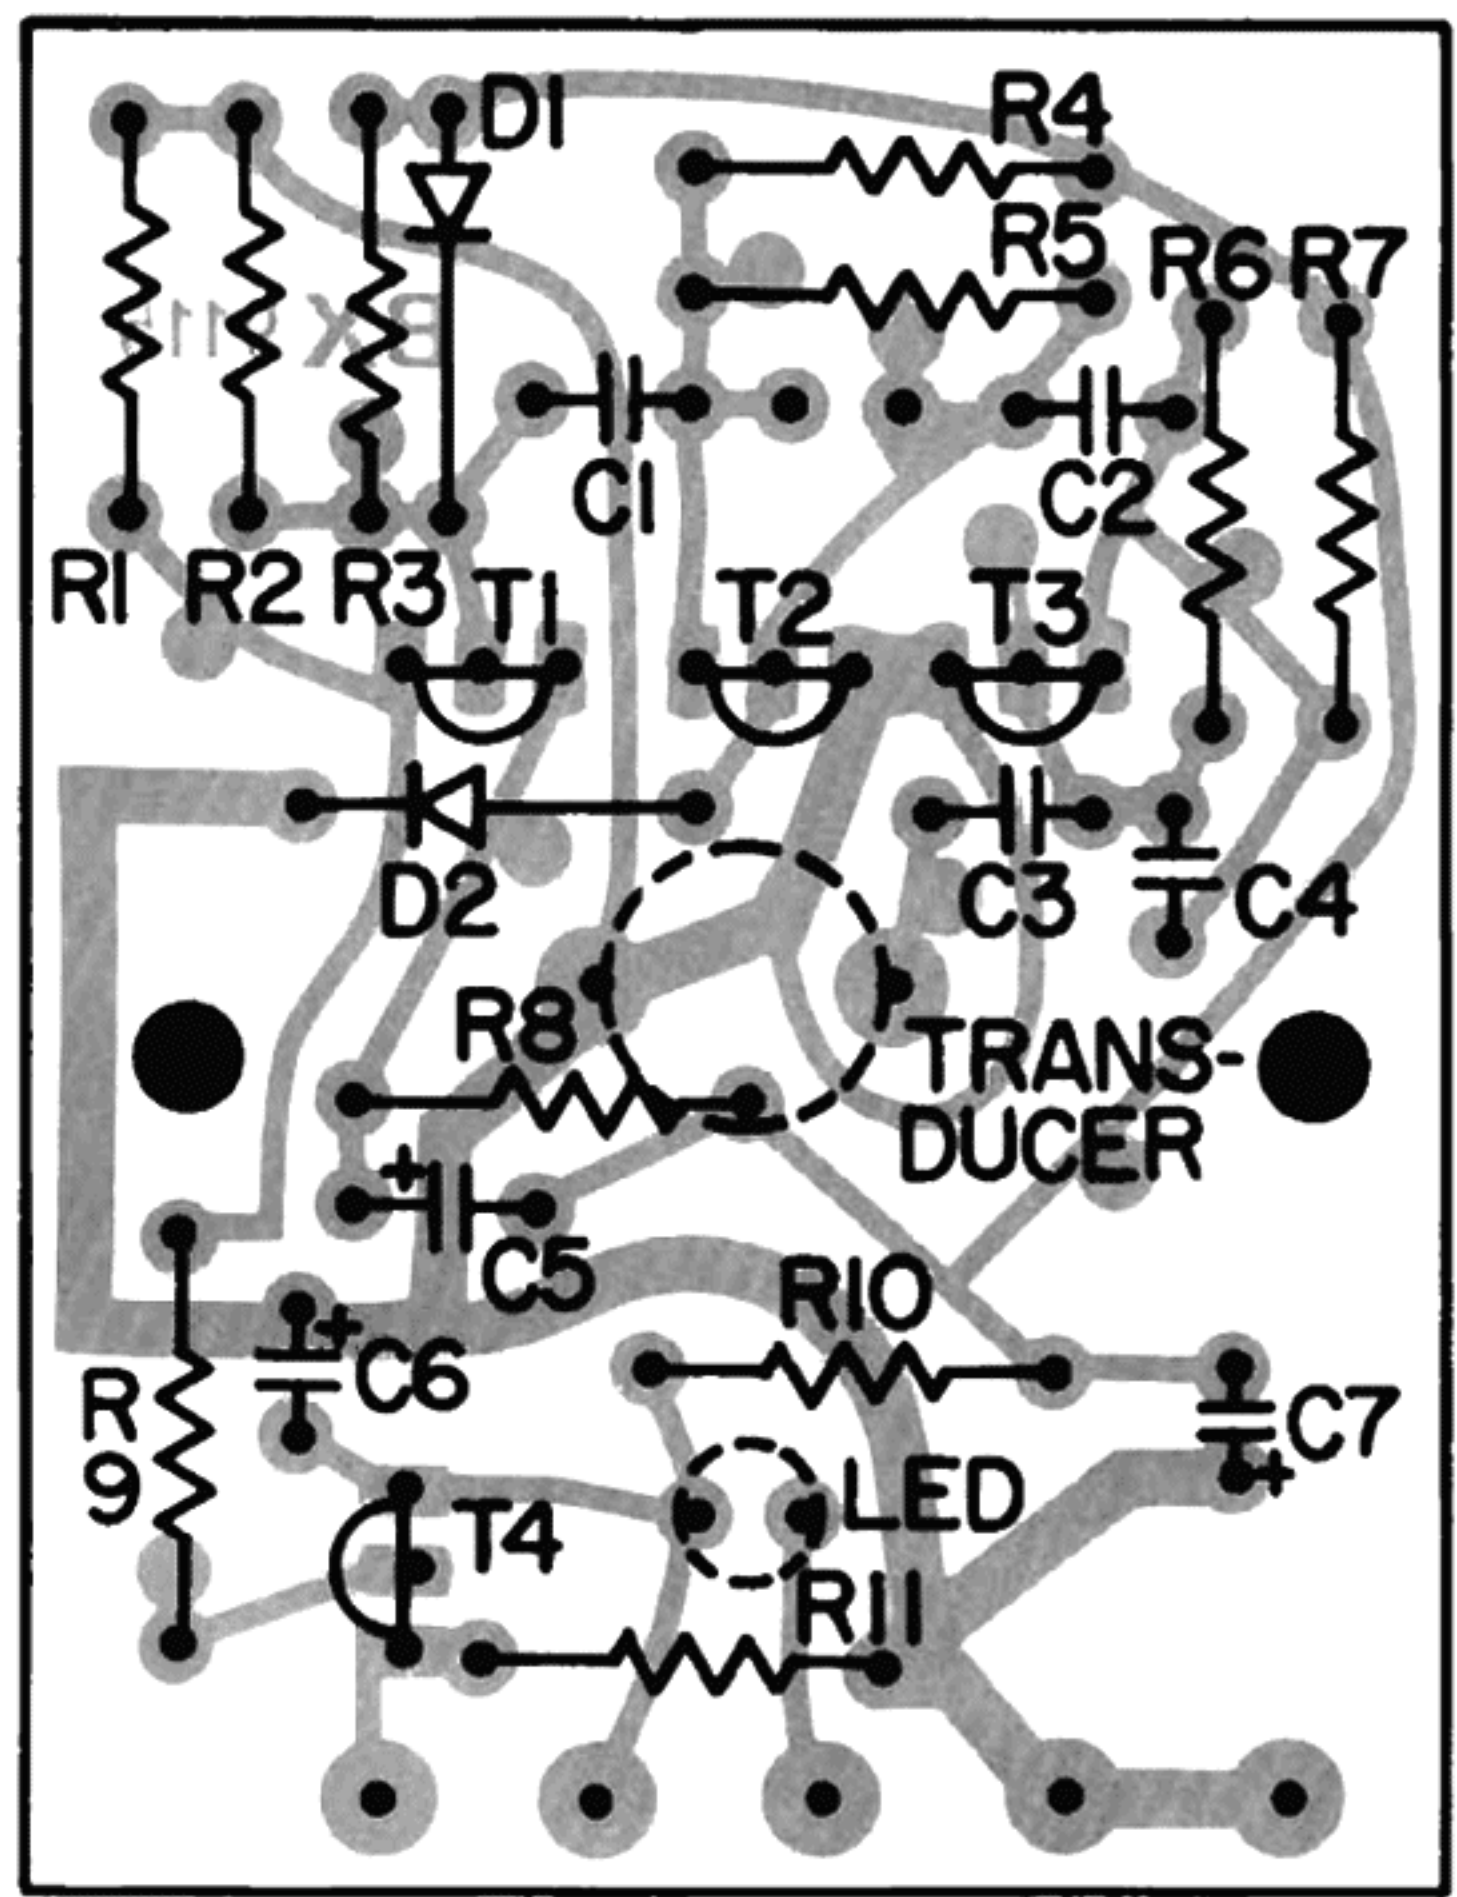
TONEARM P.C. BOARD, BOTTOM VIEW
